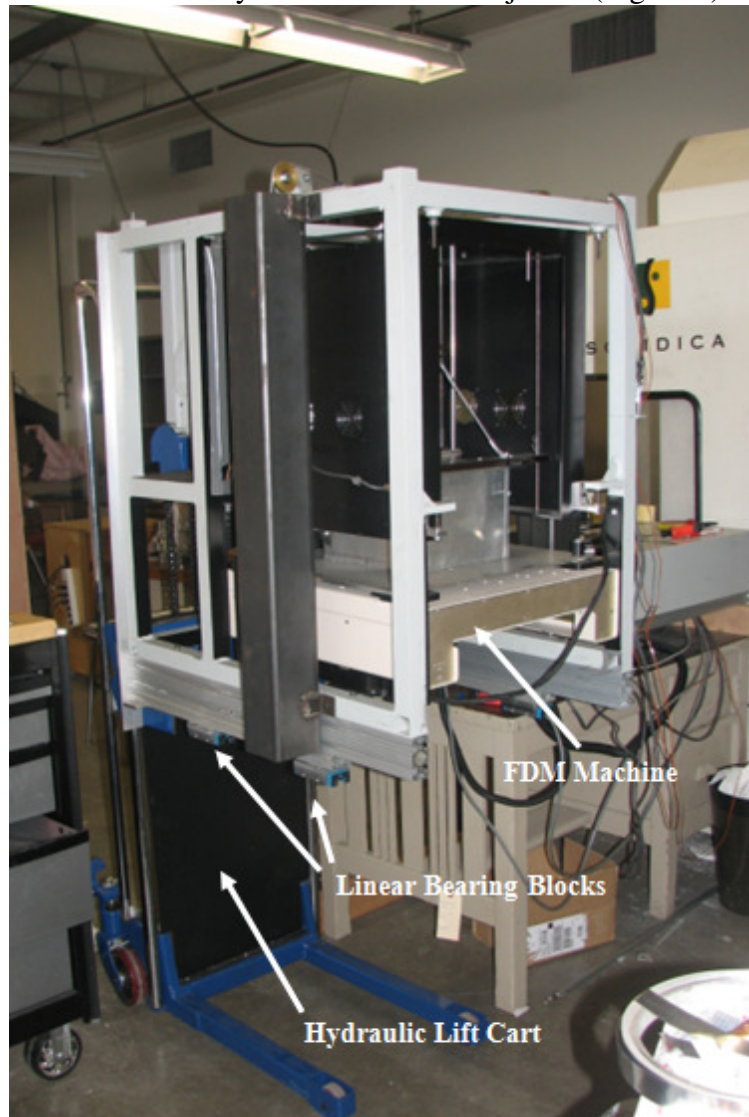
Flexible FDM machine lifted to be rolled inside the UC machine.
